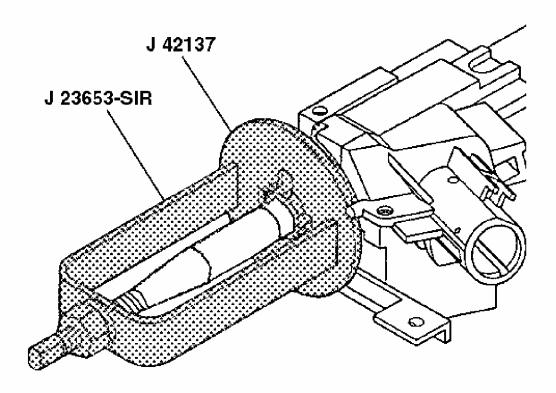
Compressing Cam Orientation Plate Using J 23653-SIR & J 42137 Courtesy of GENERAL MOTORS CORP.
